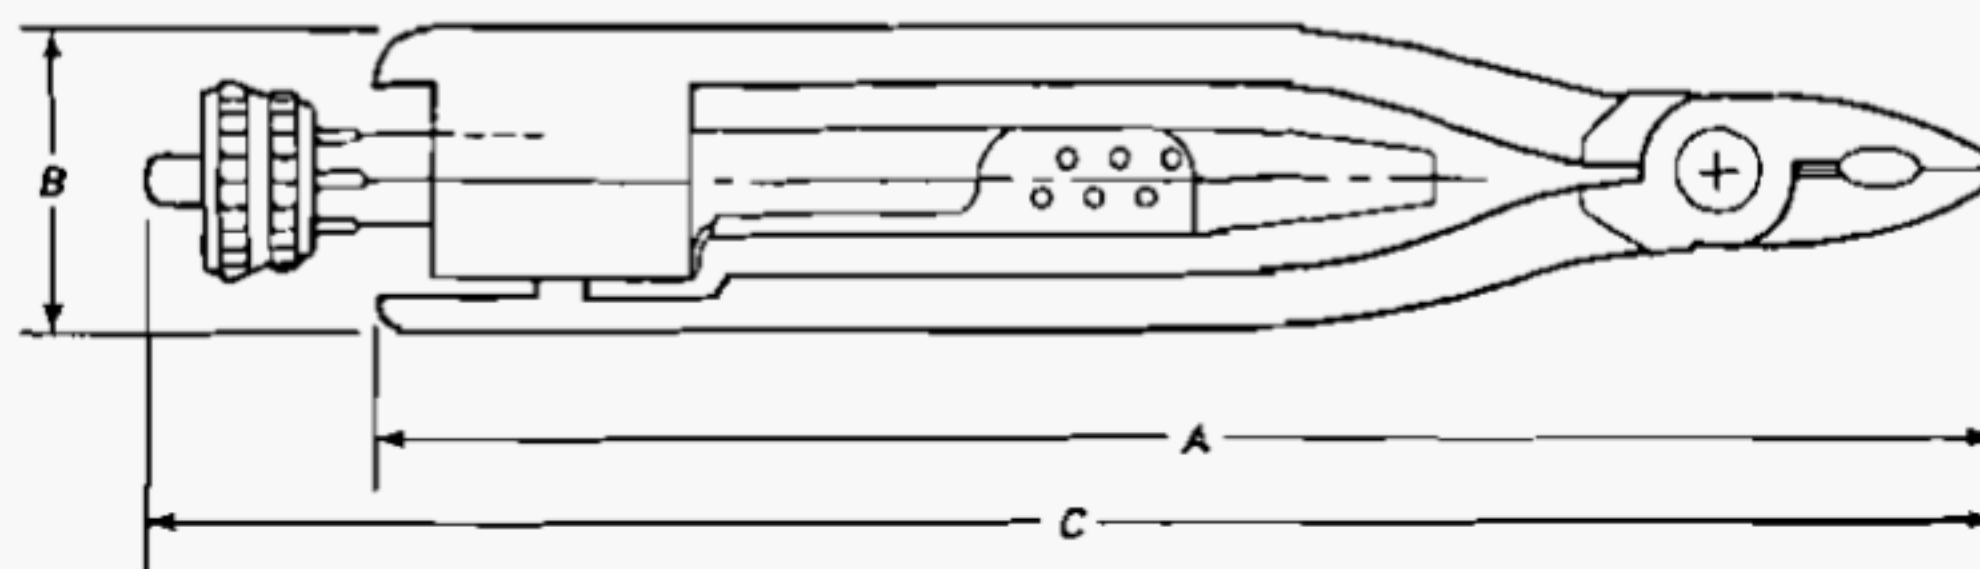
Pliers Wire Twister, With Side Cutter in Locked Position
